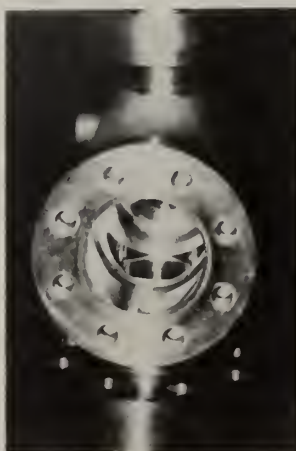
Alloy Steel Valve Body Clad on the Inside with Alloy 625 Powder using Hot-Isostatic-Pressing.
